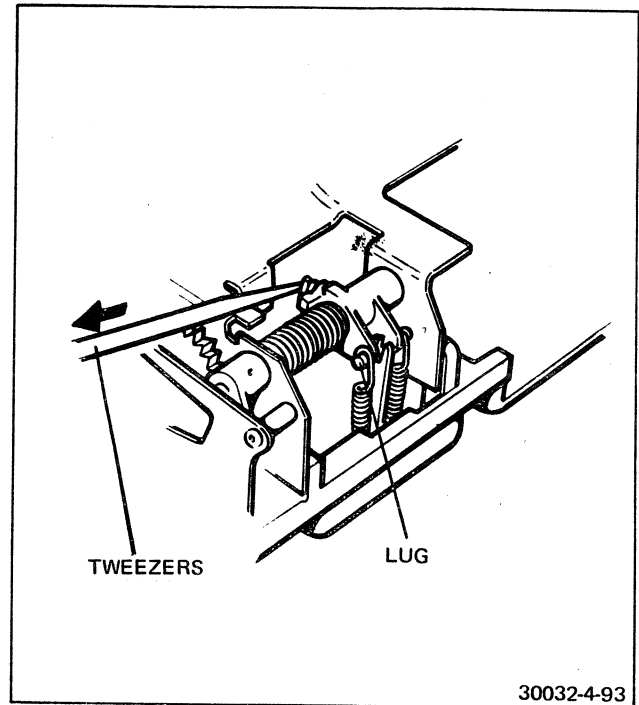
REMOVING FRESNEL CARRIER DRIVE SPRING
